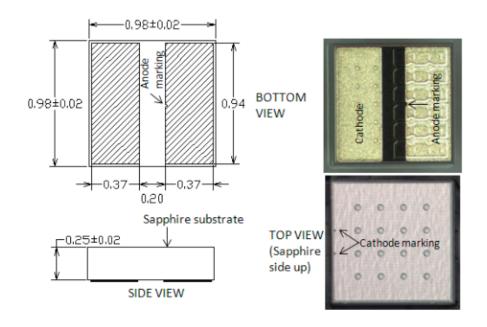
Mechanical dimensions for LUXEON FlipChip Royal Blue L0F2-Bxxx100005501.
